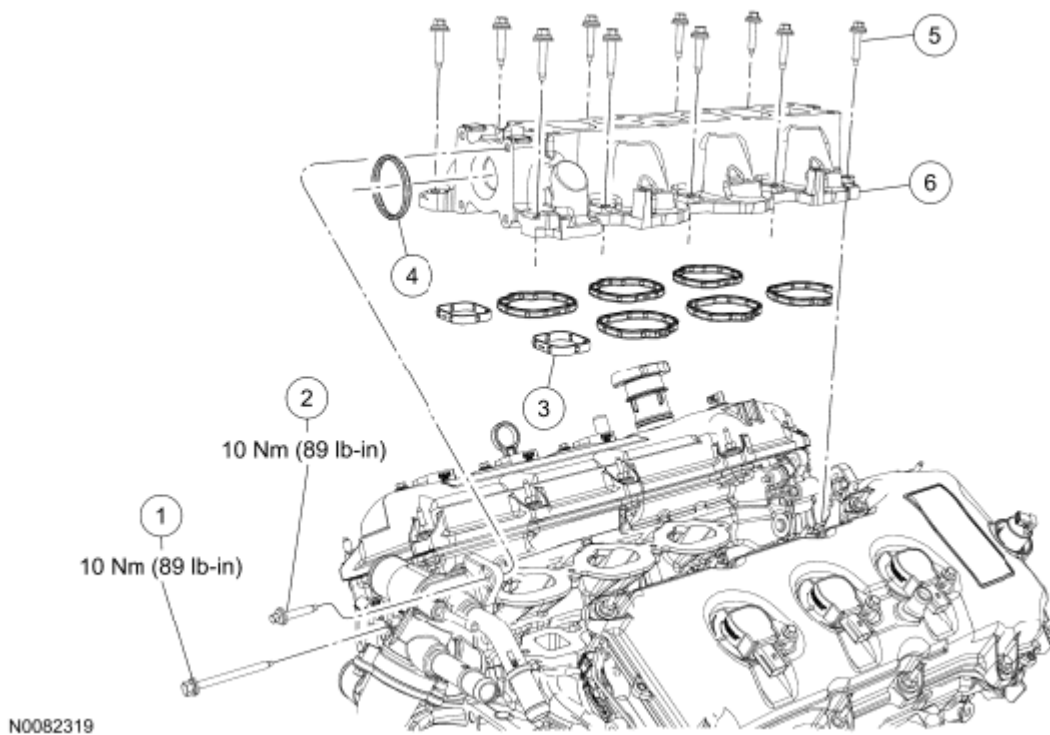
Identifying Lower Intake Manifold Components With Torque Specifications
